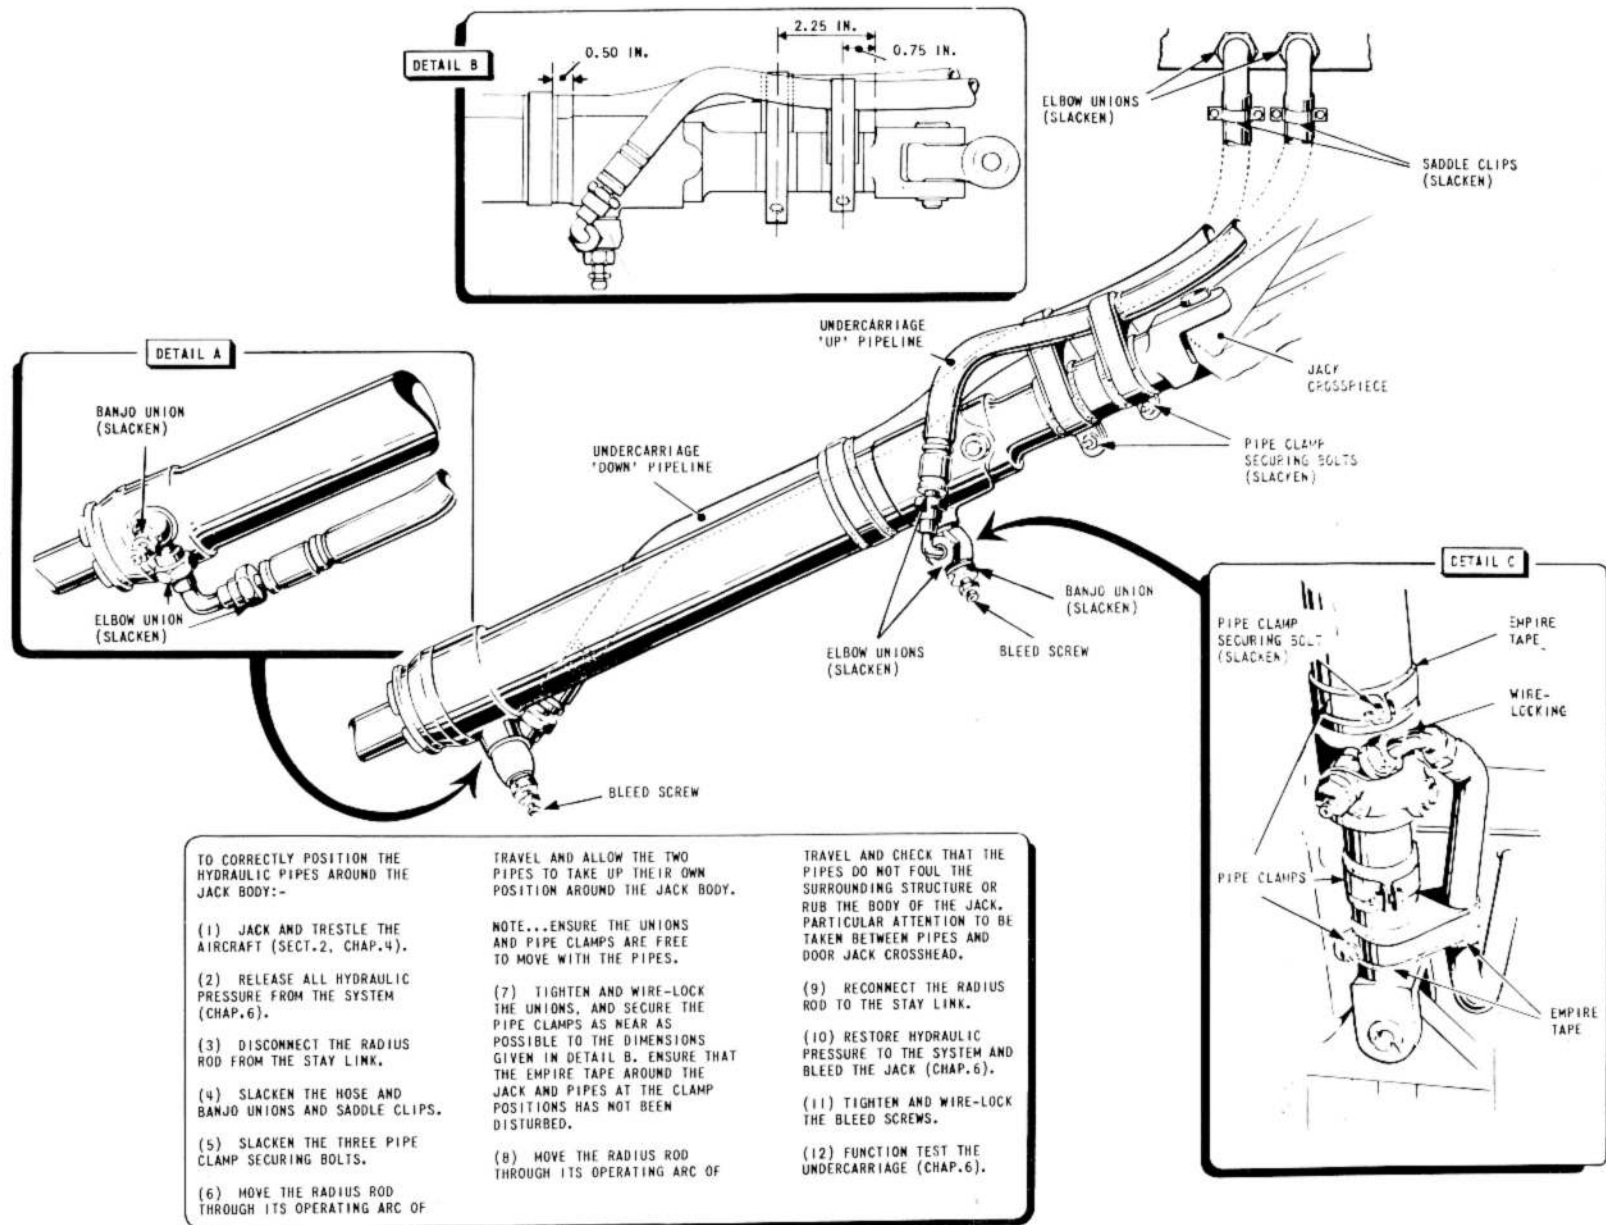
UNDERCARRIAGE JACK HYDRAULIC PIPES CLIPPING
